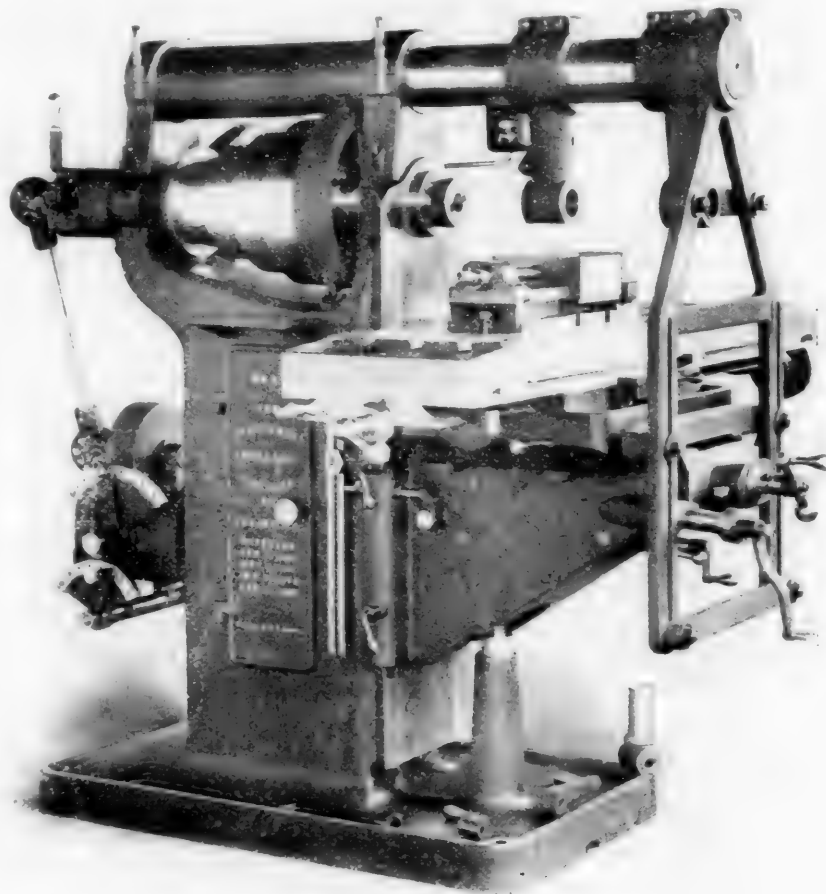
NO. 4 PLAIN CINCINNATI MILLING MACHINE.
